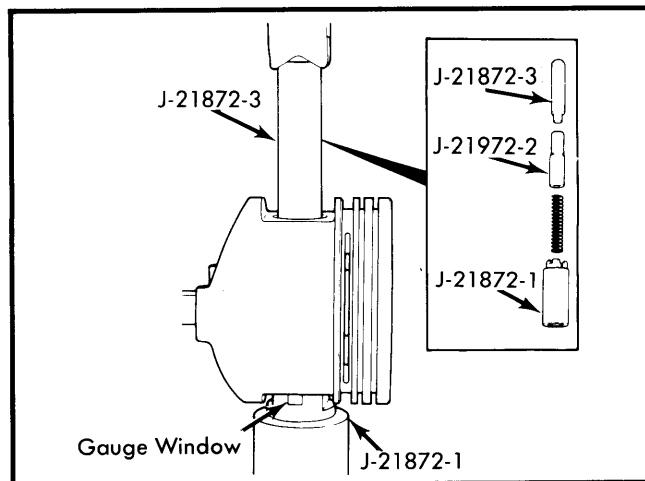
Special Tool Set Up for Piston Pin Removal and Installation
